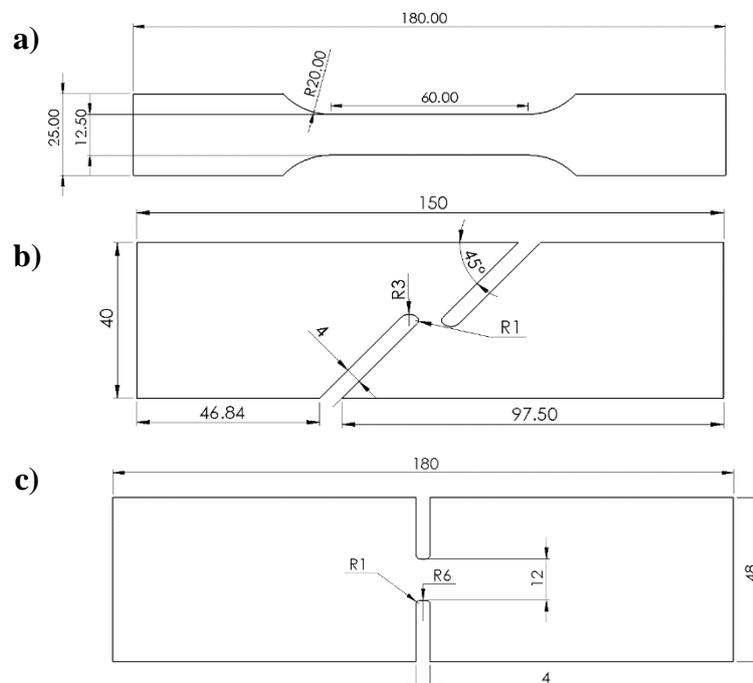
The dimensions of the a) uniaxial, b) shear and c) plane stress test specimens
